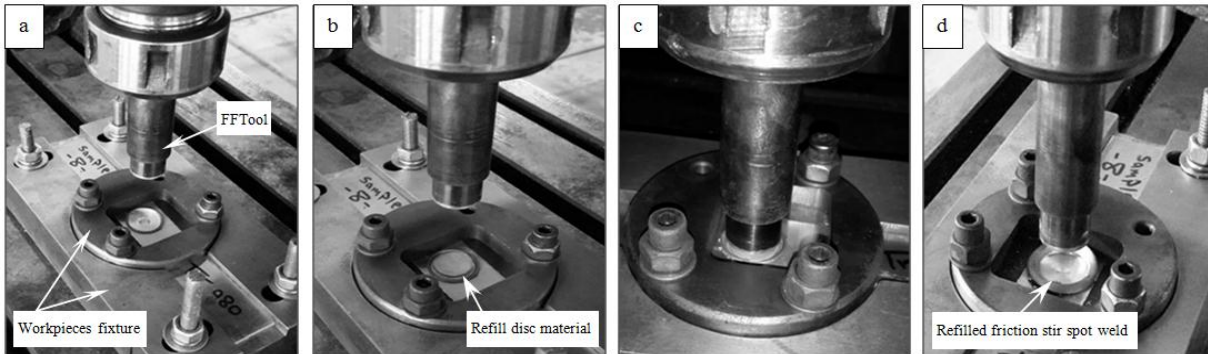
Refill FSSW process, (a) keyhole formed after the welding stage, (b) placing the refill disc on center of the spot welded, (c) touching the non-rotating FFTool on the upper surface of the refill disc, and (d) FSSWed joint with a refilled keyhole
